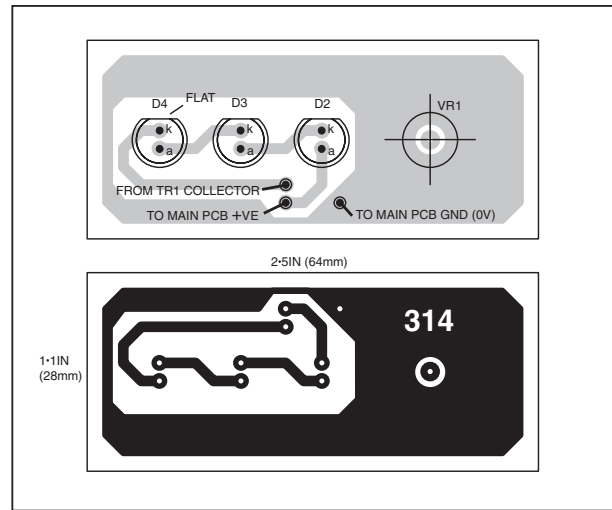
Red L.E.D. Display board component layout and copper foil master.
